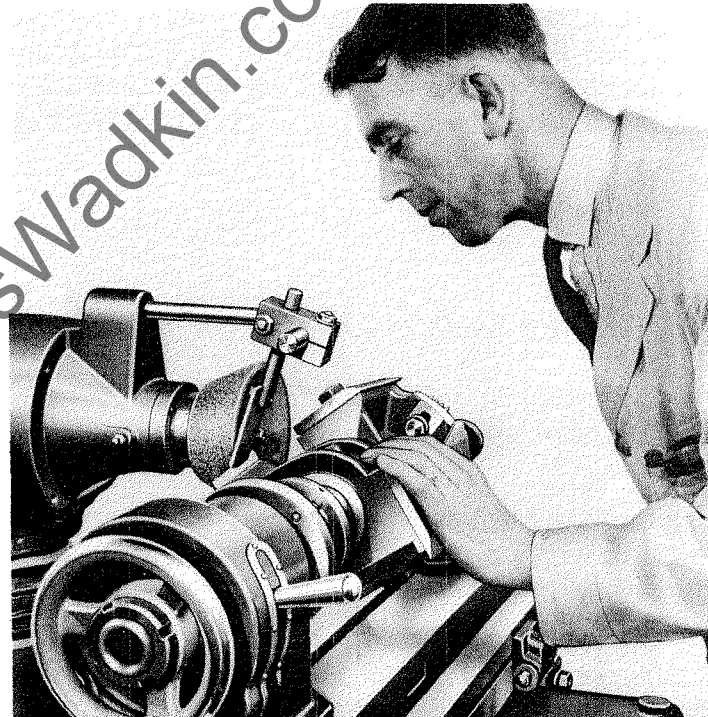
Showing the actual operation of grinding, indicating the best position for the operator.
